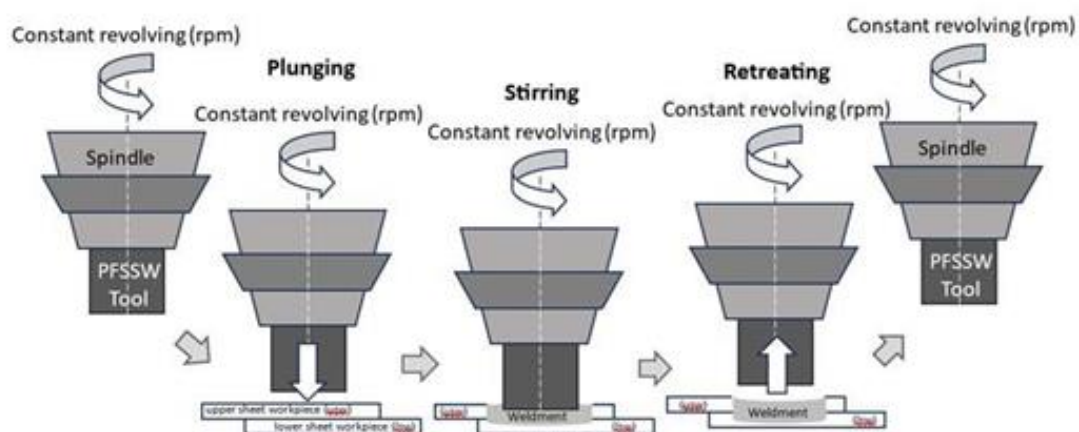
Illustration of the principle of the friction stir welding process.
